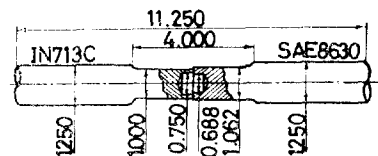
Shape and dimensions of tensile test specimens, IN 713C(left) and SAE 8630(right)
